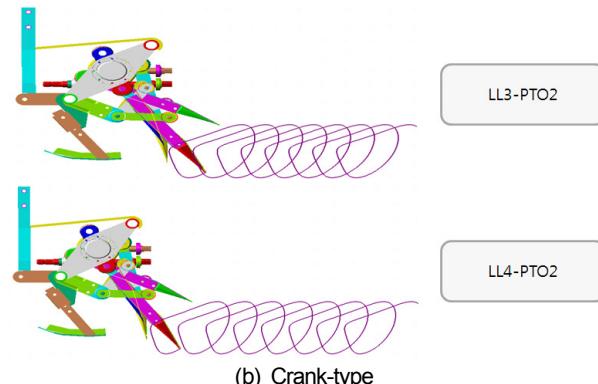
Traces at the end of tillage blades at the commonly used gear conditions.
